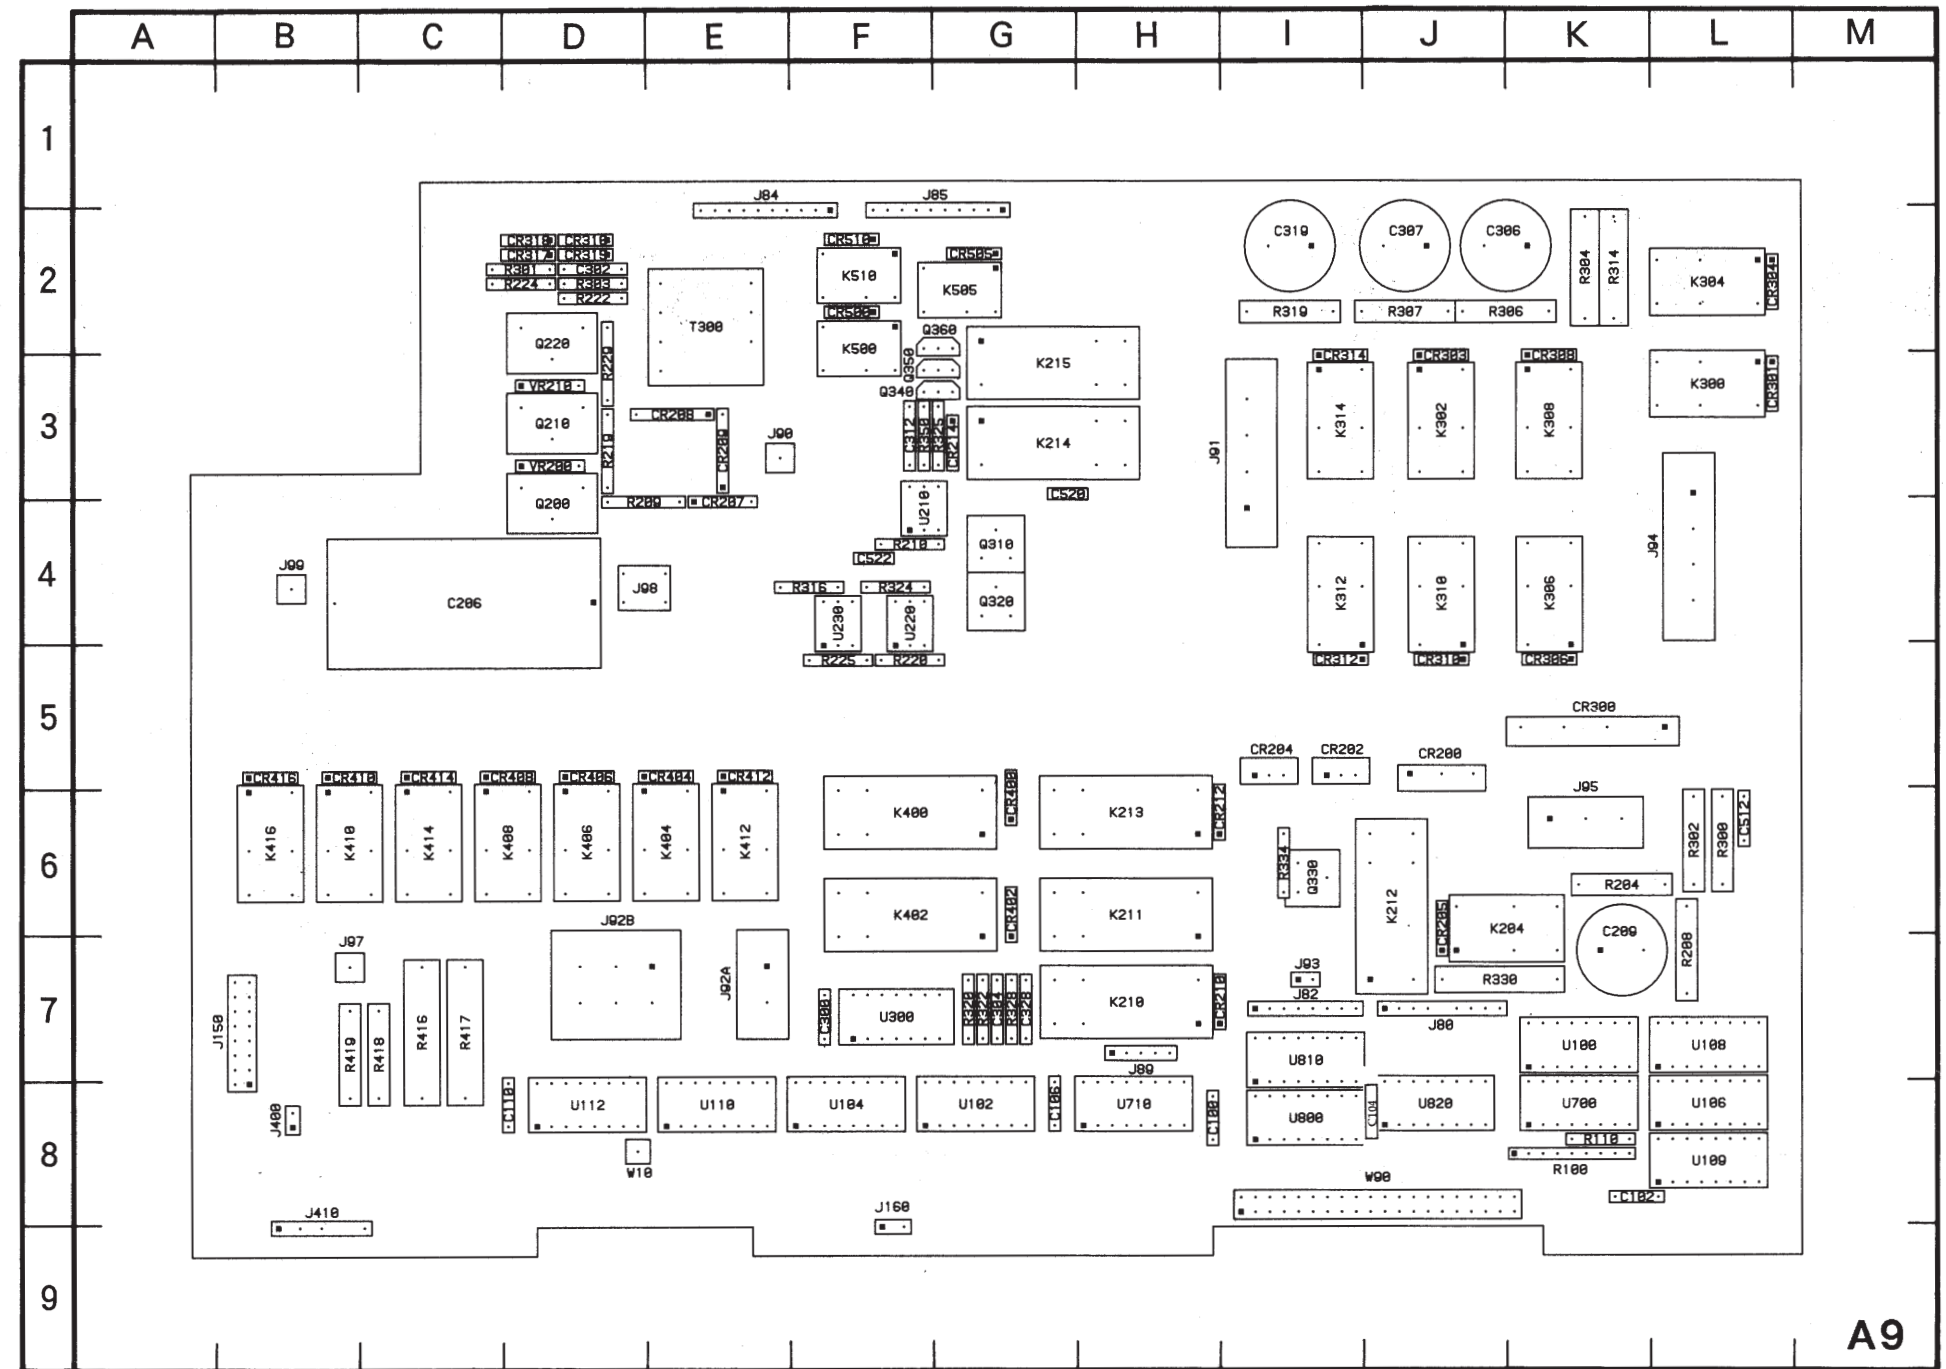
A9 — Low Voltage Relay circuit board assembly.
